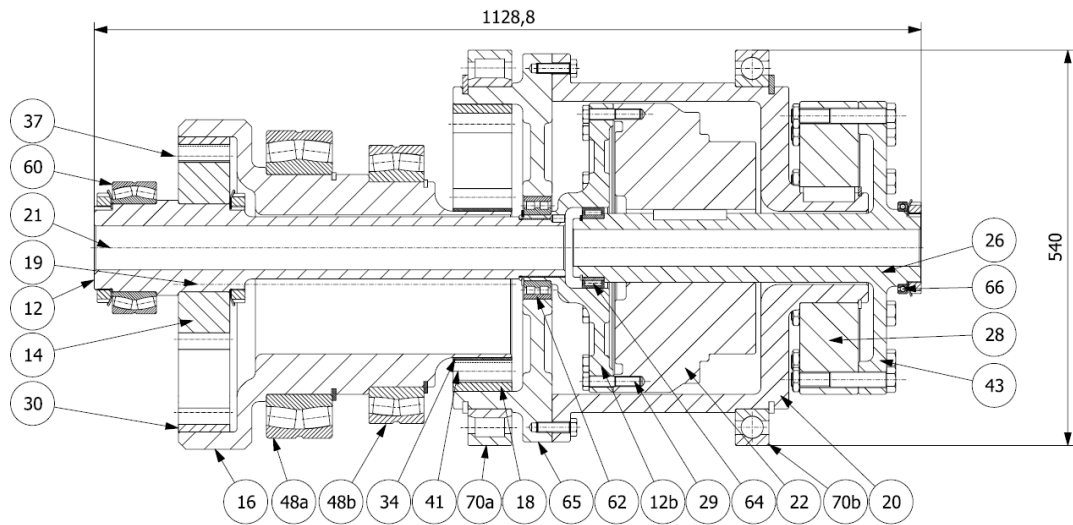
Siemens NX drawing of the designed NASA Offset Compound Gear
